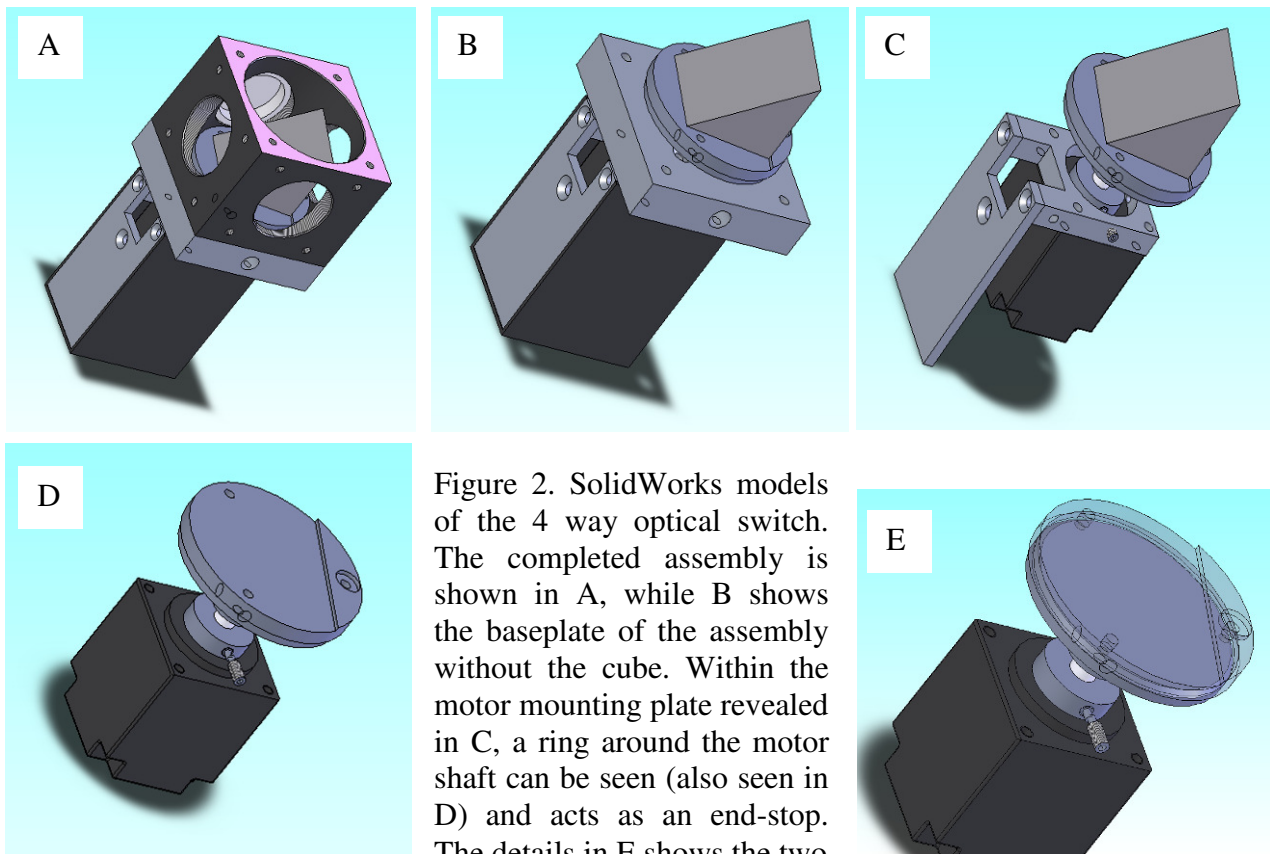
SolidWorks models of the 4 way optical switch. The completed assembly is shown in A, while B shows the baseplate of the assembly without the cube. Within the motor mounting plate revealed in C, a ring around the motor shaft can be seen (also seen in D) and acts as an end-stop. The details in E shows the two
